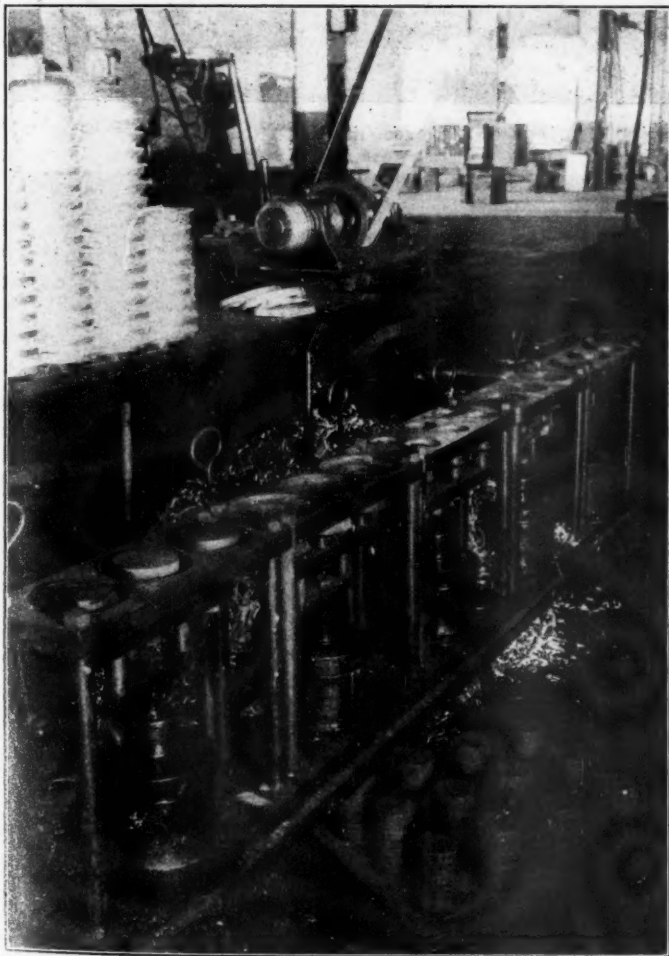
Molds for Pouring and Machine for Finishing Piston and Valve Rod Packing Rings.
